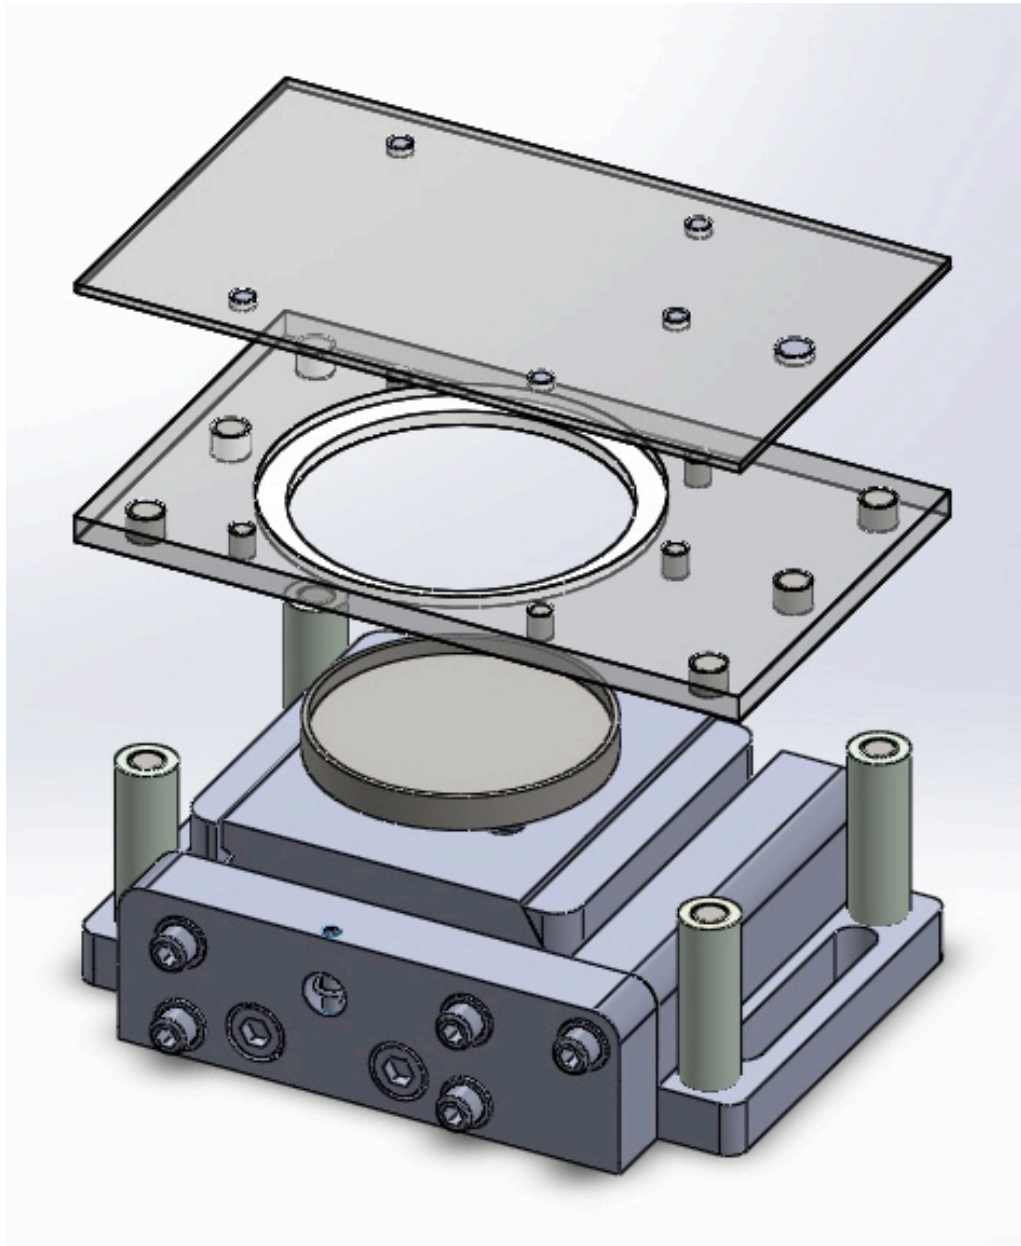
SolidWorks diagram of alignment rig including all attachments. Dimension of full assembly = 117 mm x 72 mm x 45.5 mm (W x L x H).
